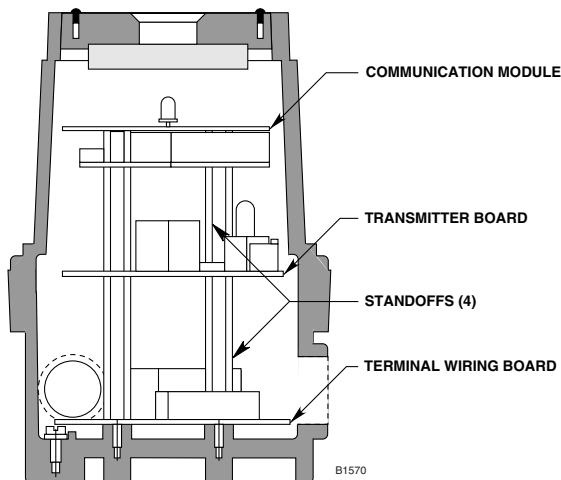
Printed Circuit Boards in Combustible Gas DCU
